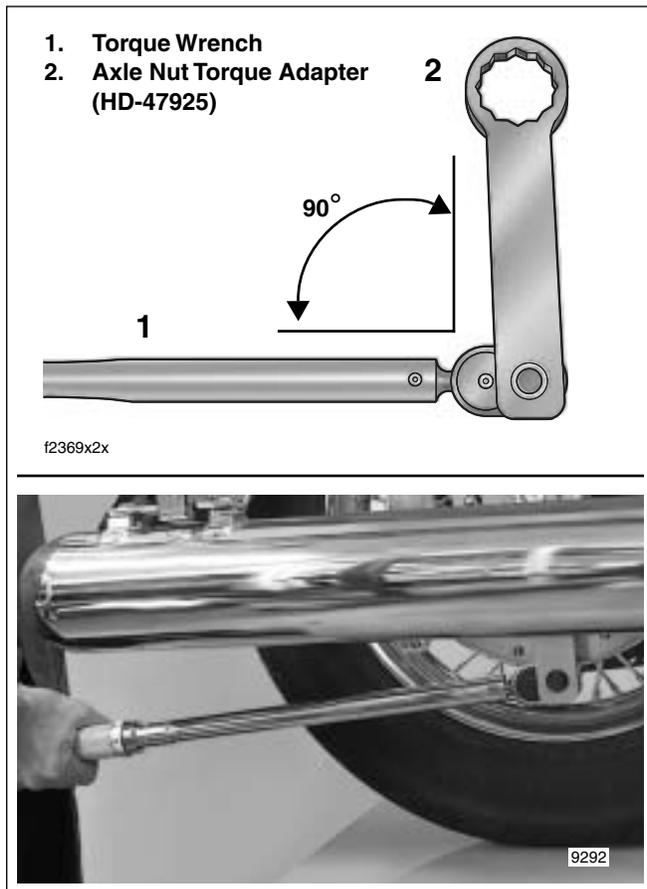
Install Tool Perpendicular to Torque Wrench
